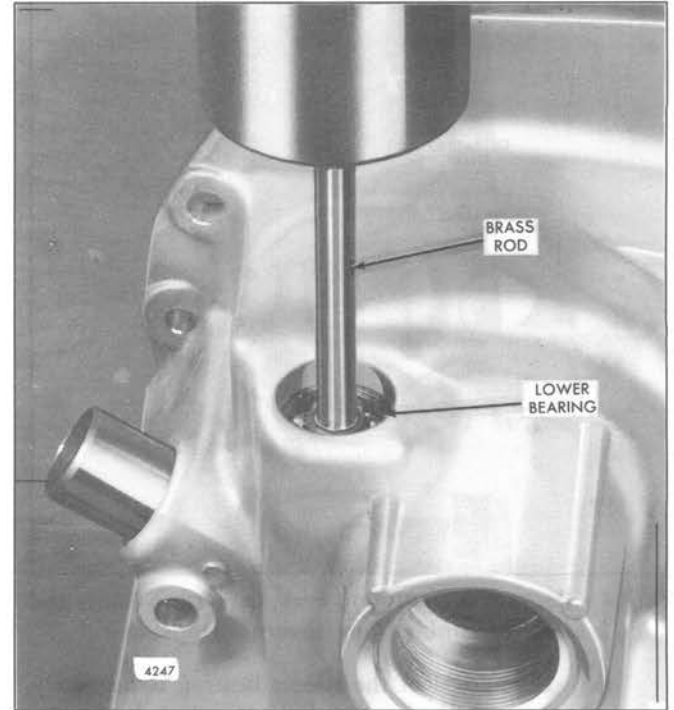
Removing Operating Shaft from Operating Shaft Lower Bearing
